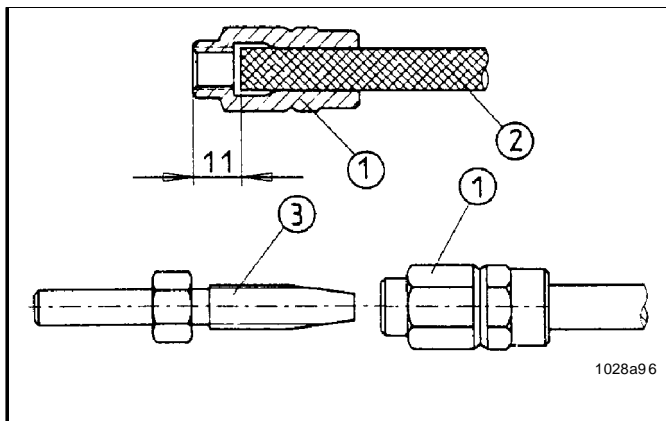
Preassembly of threaded sleeves and hose studs on the high-pressure hose
